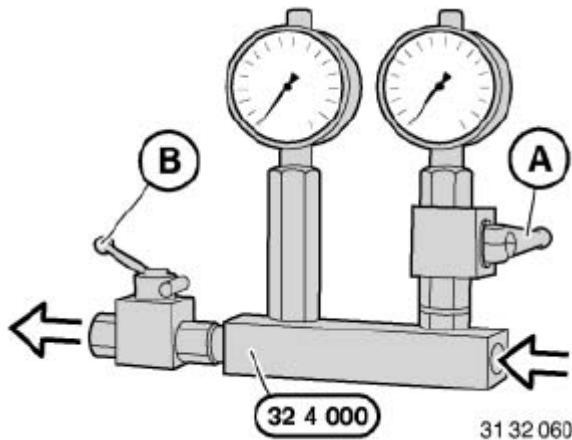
Identifying Special Tool 32 4 000 And Valve
